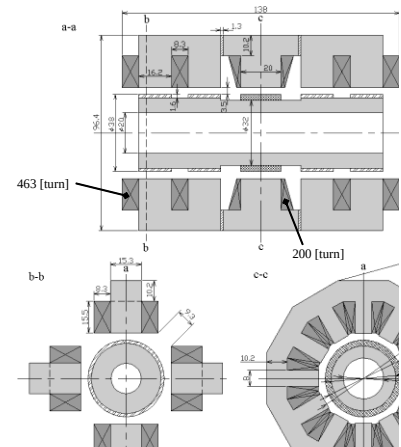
Dimensions of the hybrid magnetic bearing and motor system
